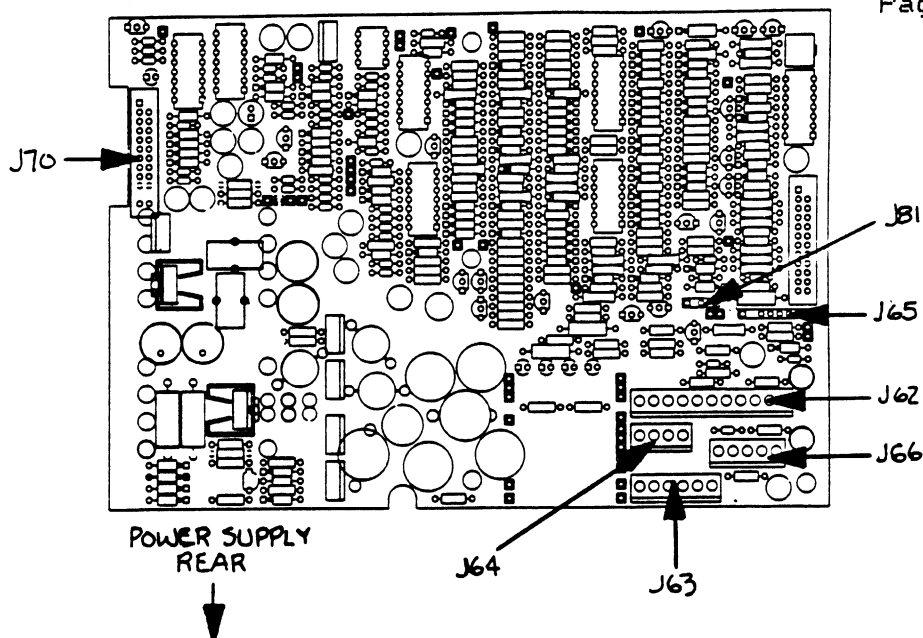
Bottom view of the A3 Control Rectifier Board showing connector locations.
